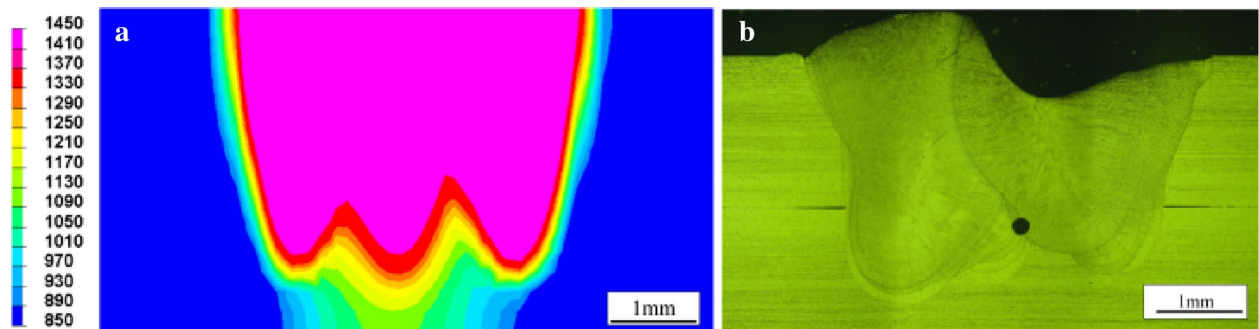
Welding method is the combined surface temperature field of the new 6-sections welding joint
